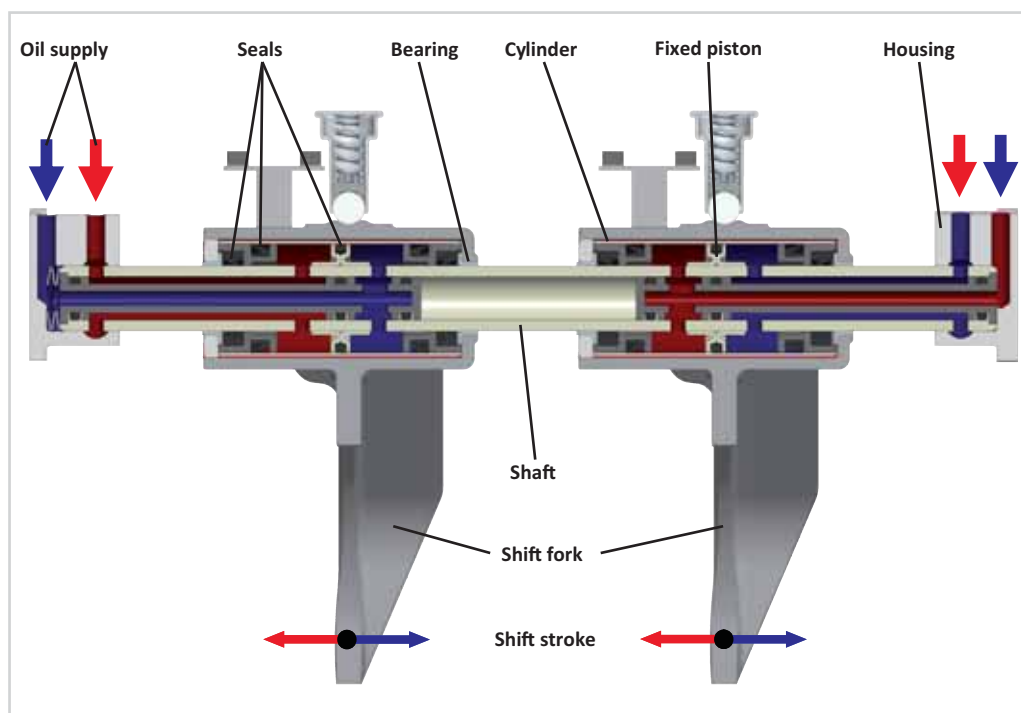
INA integrated hydraulic gearshift fork actuator: Setup
